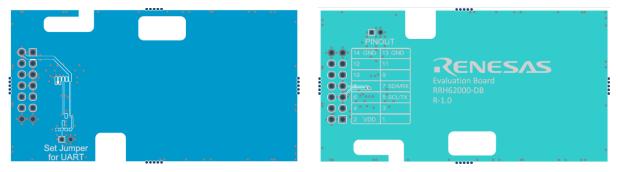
Sensor Board RRH62000 Layout with PIN Configuration
